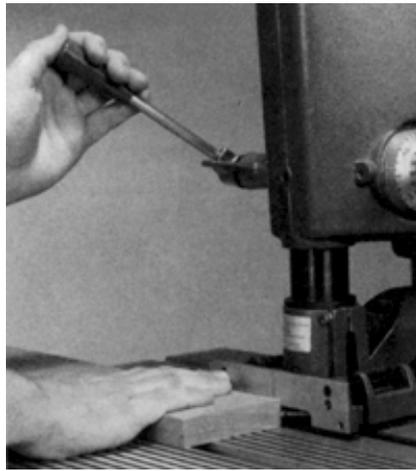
Use the quill adjustment to position blade for cut. Allow clearance between biscuit joiner and worktable.
